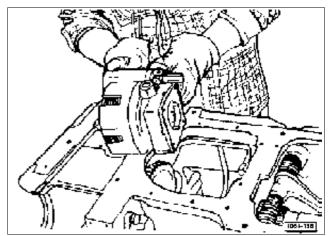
Position the complete P.T.O. clutch assembly in the transmission housing.
